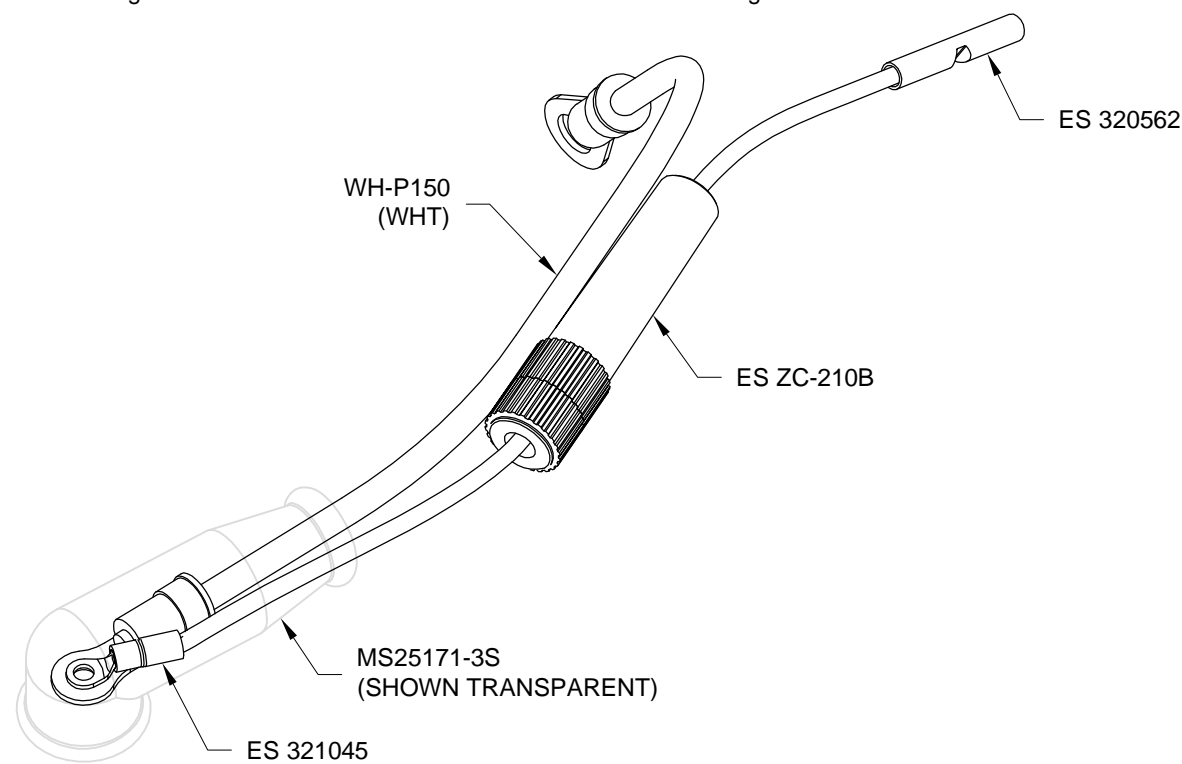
CUTTING THE IN-LINE FUSE HOLDER
